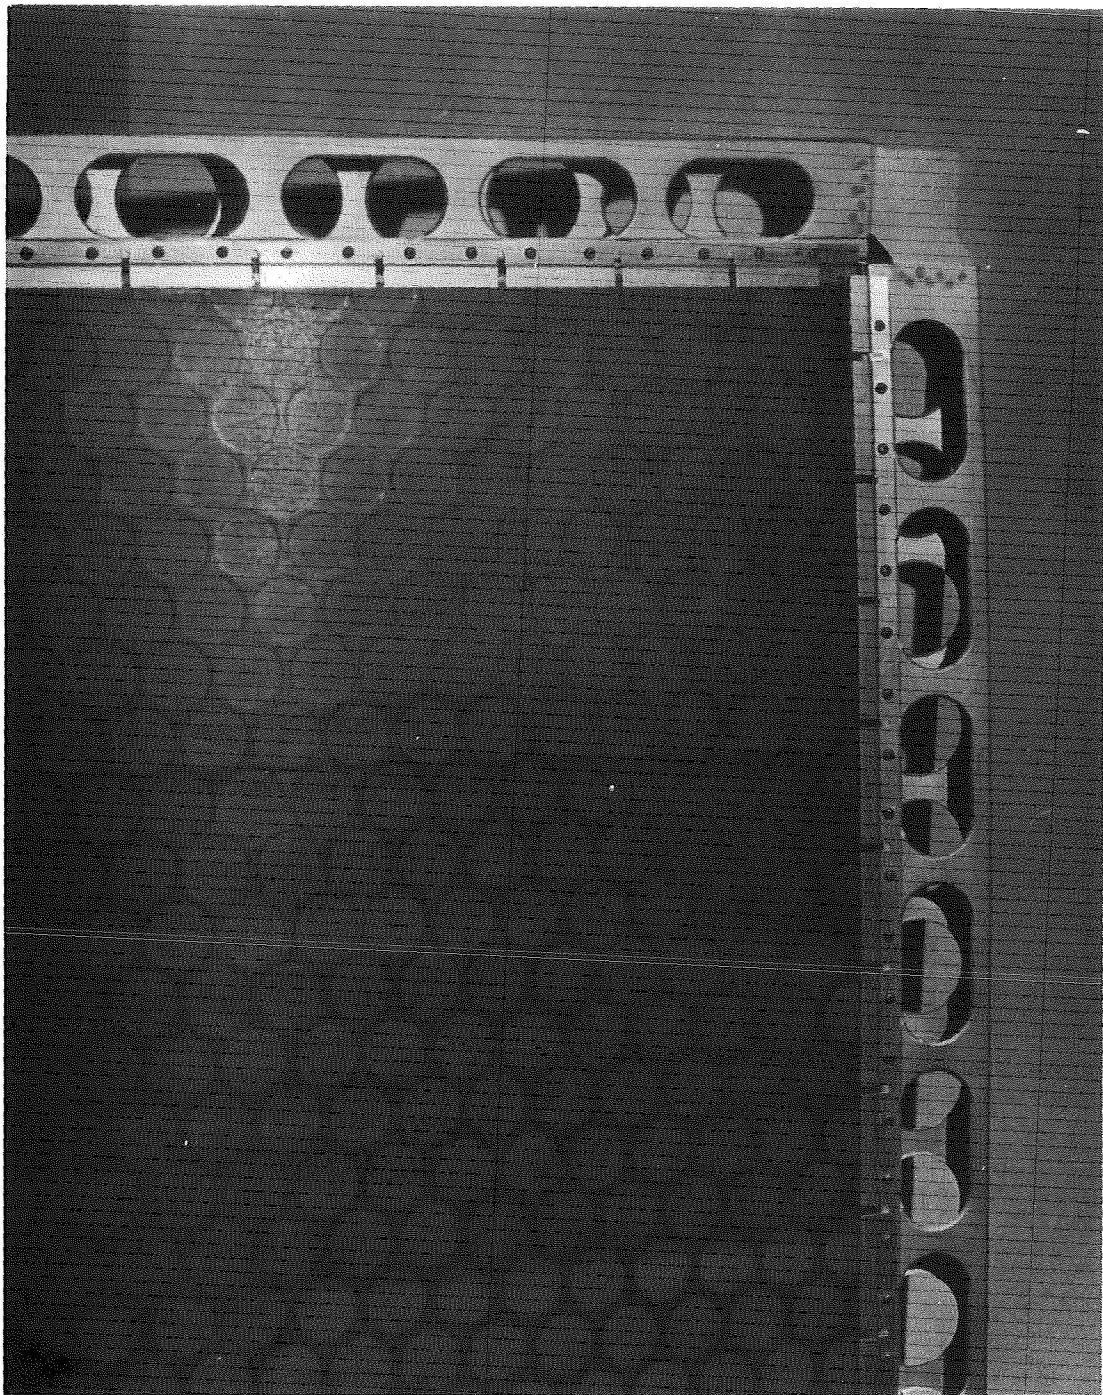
Substrate Subassembly Riveted to Lower Seam Assembly
